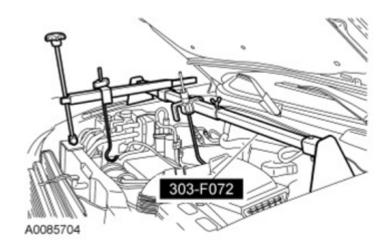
Installing Engine Support Bar Courtesy of FORD MOTOR CO.
